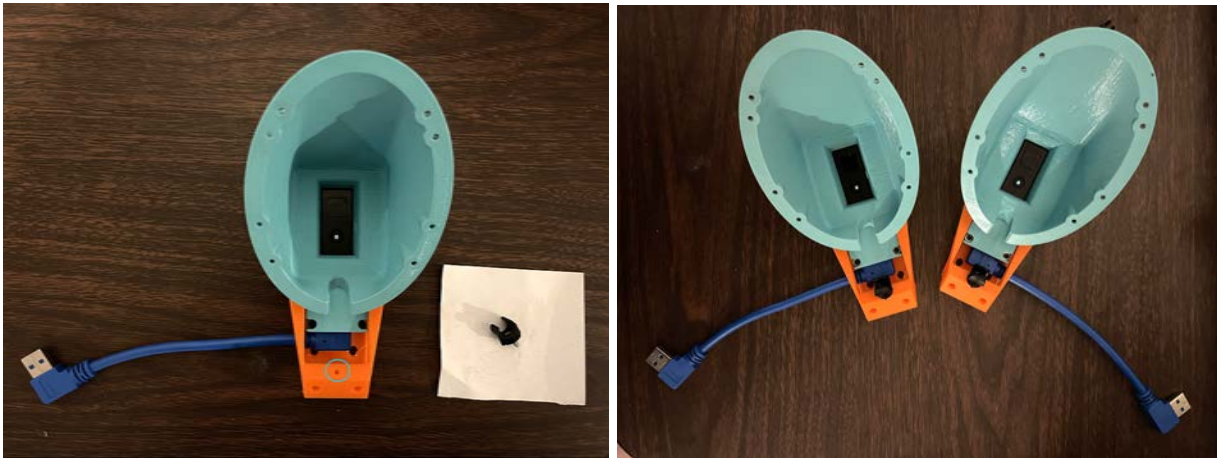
Alignment clip screwed onto part Gripper\_Finger\_Mount
